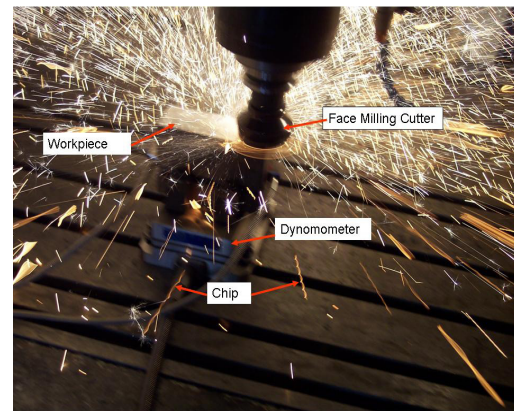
Heat dissipation through chip while machining, $V_c = 278.1\ \text{m/min}$
